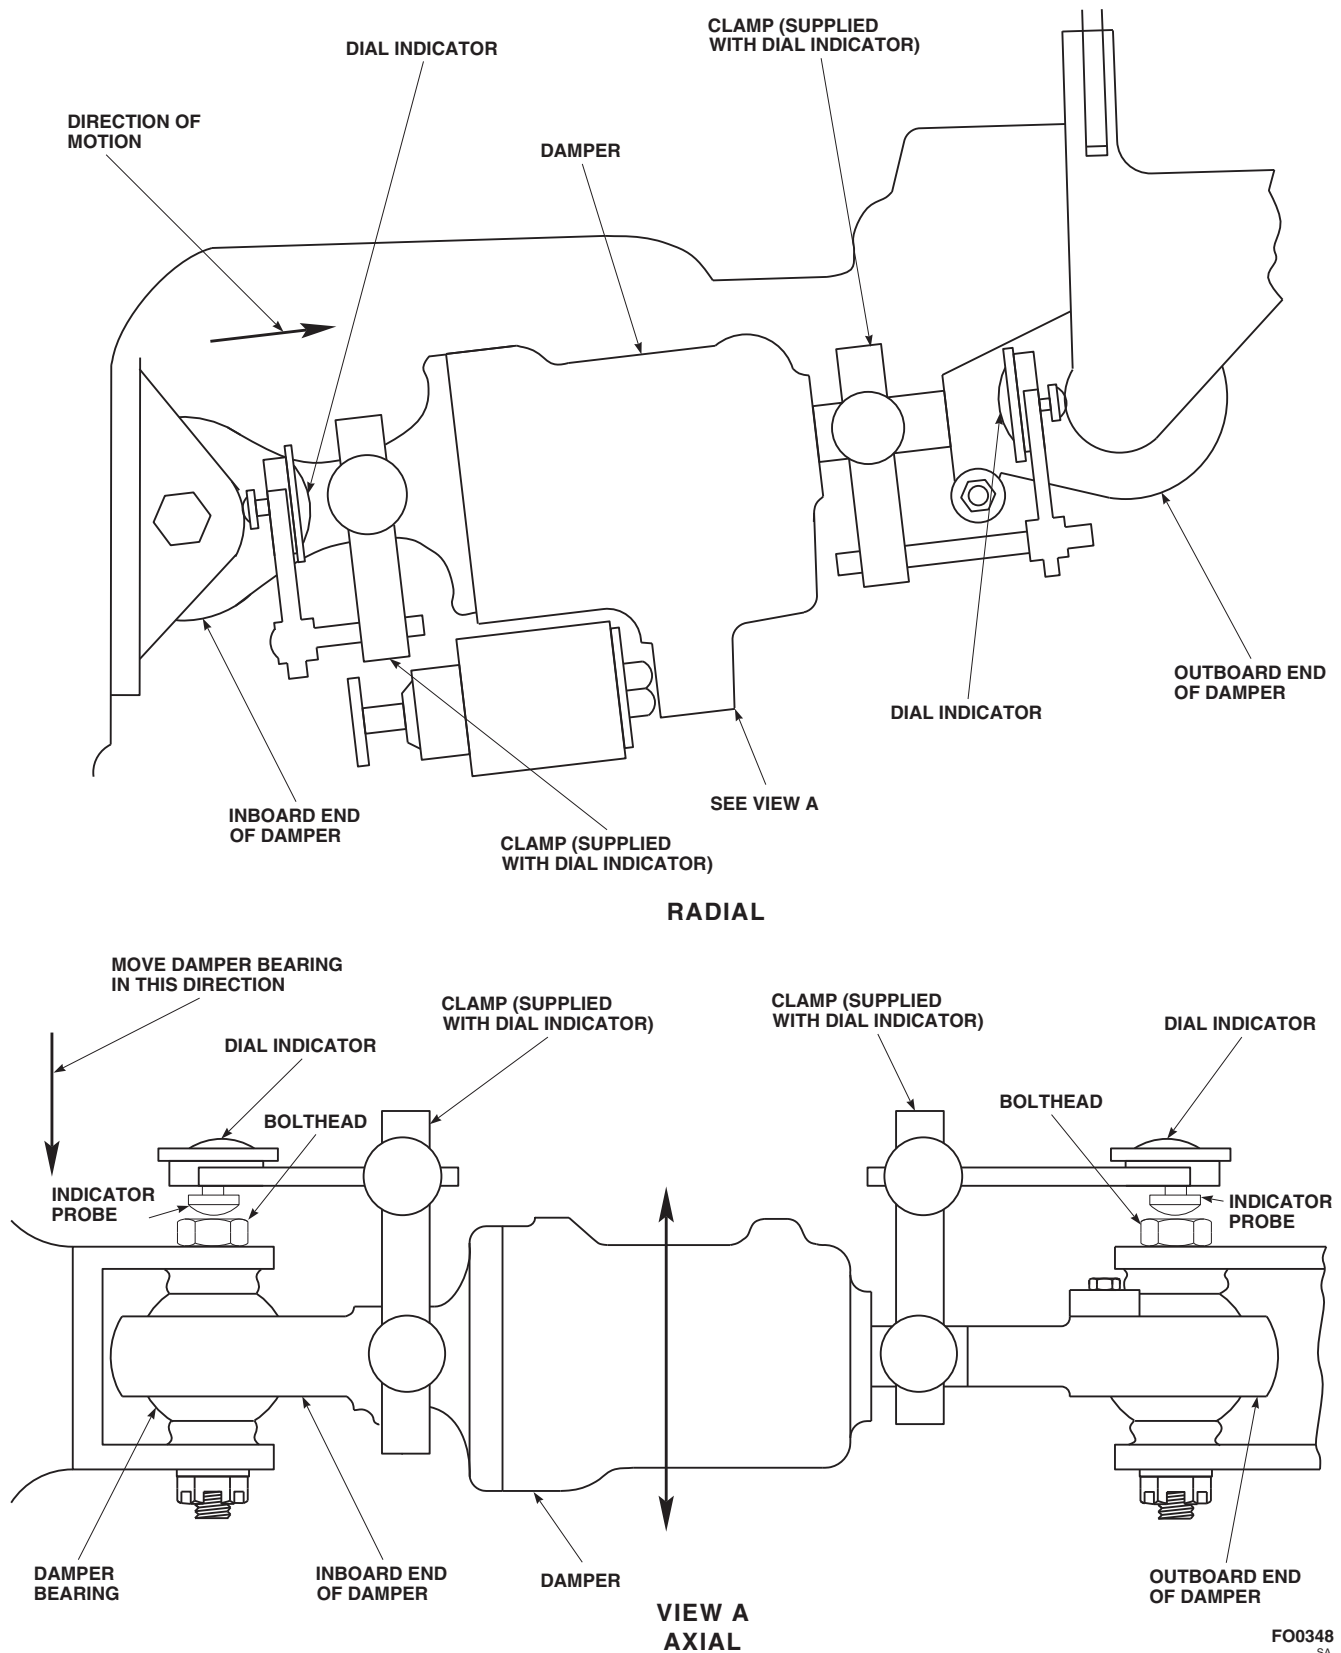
INSPECT DAMPER BEARINGS
